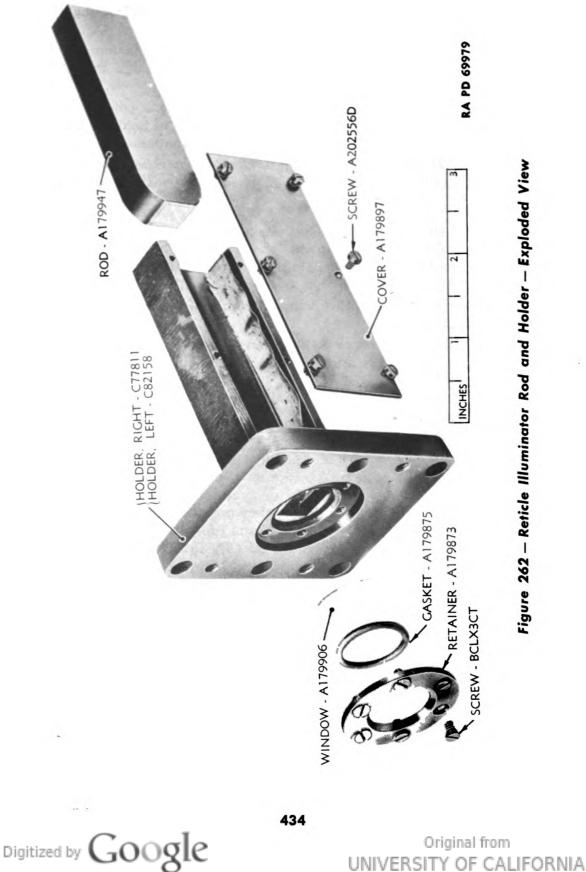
Reticle Illuminator Rod and Holder – Exploded View
